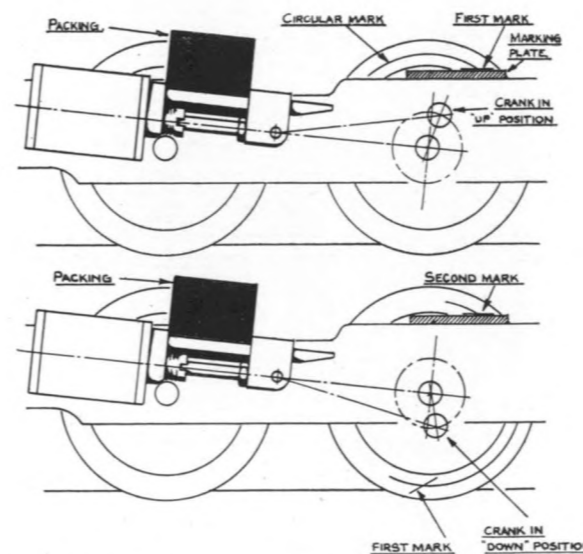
Finding the back "dead centre" position of the crank. Top—making the first mark. Bottom—making the second mark.
